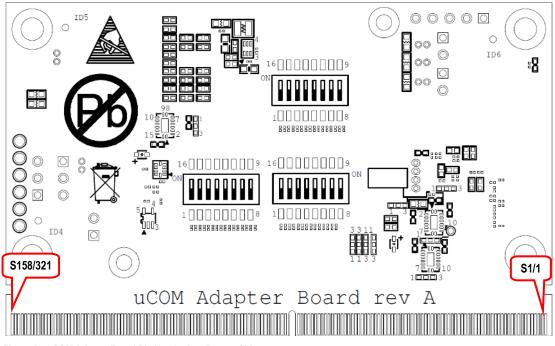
uCOM Adapter Board Pin Numbering, Bottom Side
